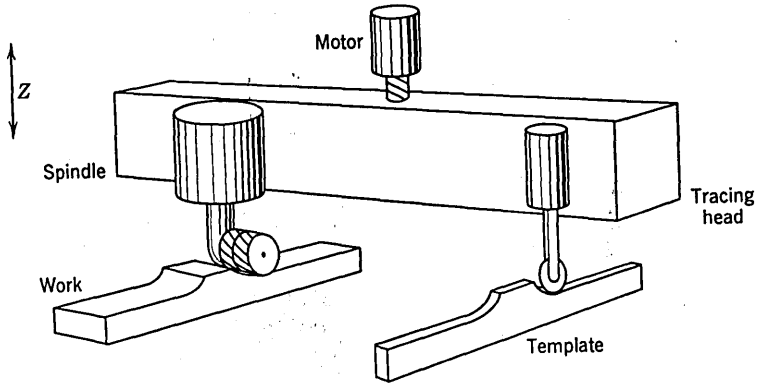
Single-dimensioned control employing tracing head and mechanical tie to spindle motor
